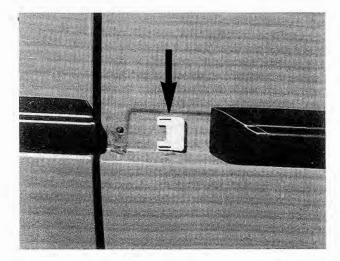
Beveled clip (arrow) for body side moldings. Slide molding onto clip first, then press onto other clips.
